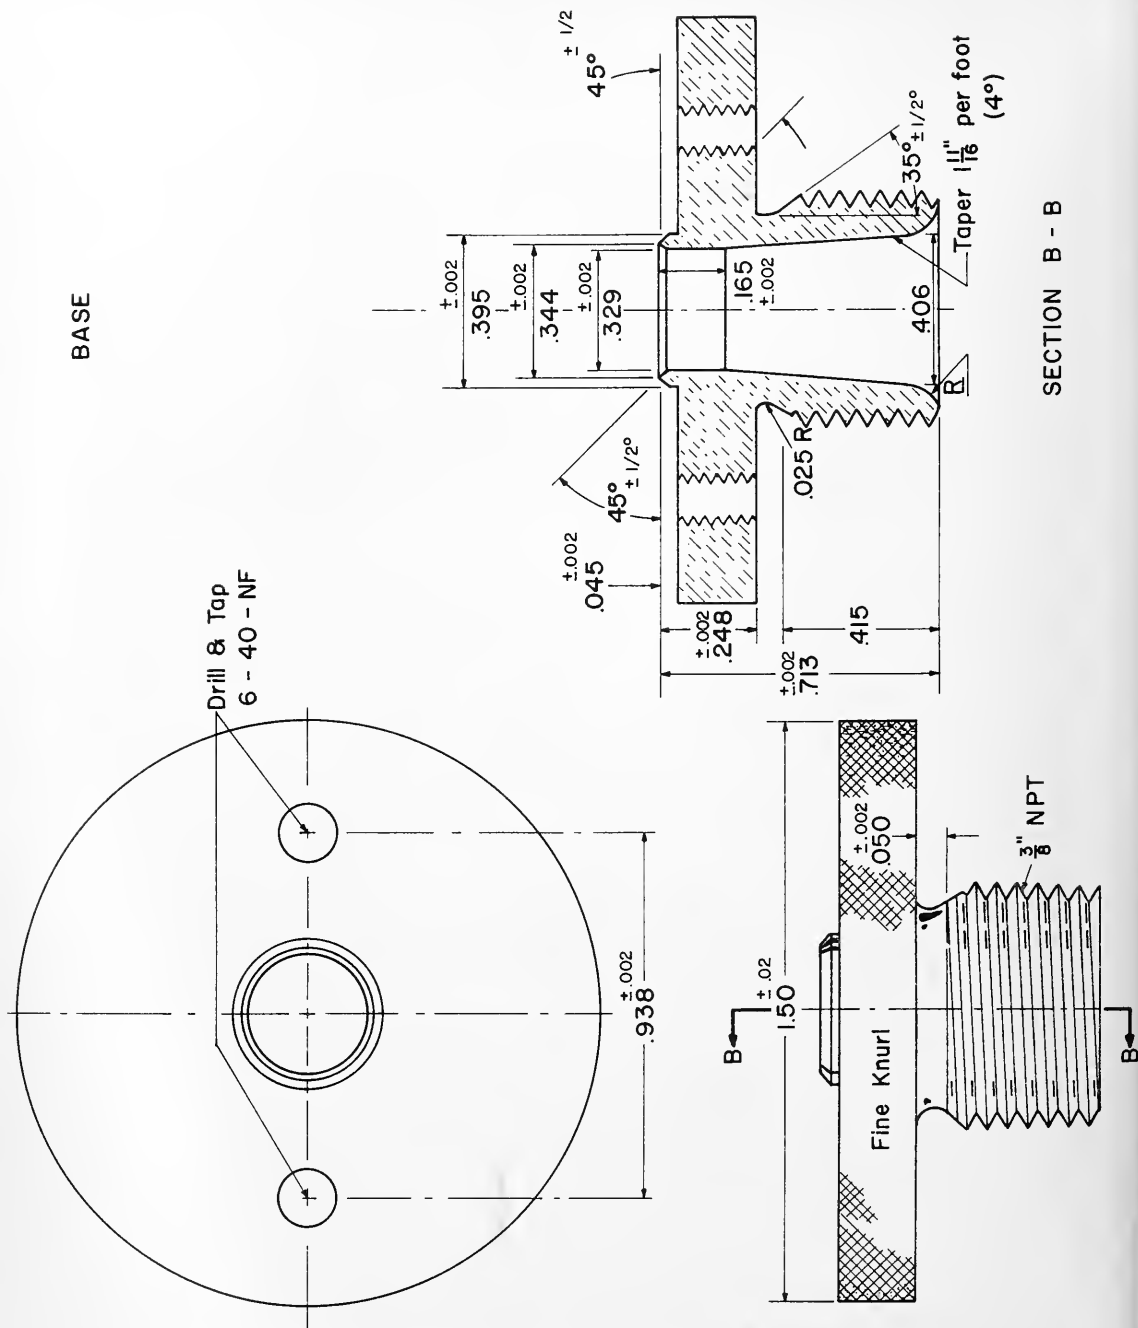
DETAILED DIMENSIONS OF THE 3/4-SCALE SPRINKLER (Cont'd.)
